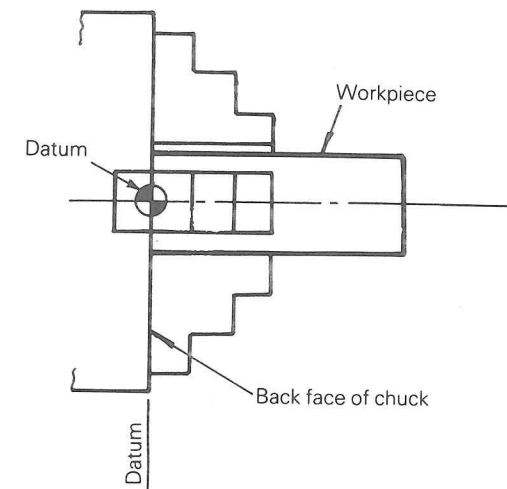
Accurate location of a turned component providing constant datum position.
